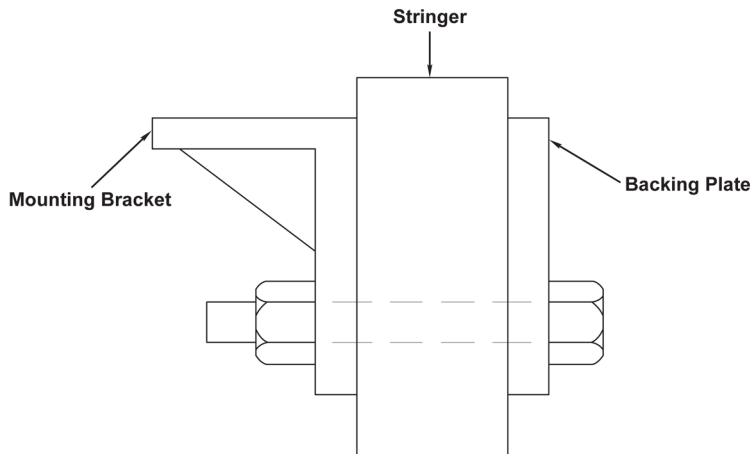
Side Mounted Engine Bed – Through Bolted with Backing Plate
